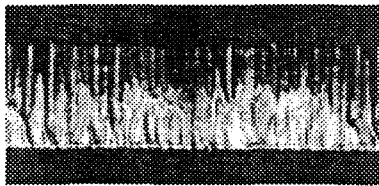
view of cut edge with nozzle gap 0.1mm (0.2t)
